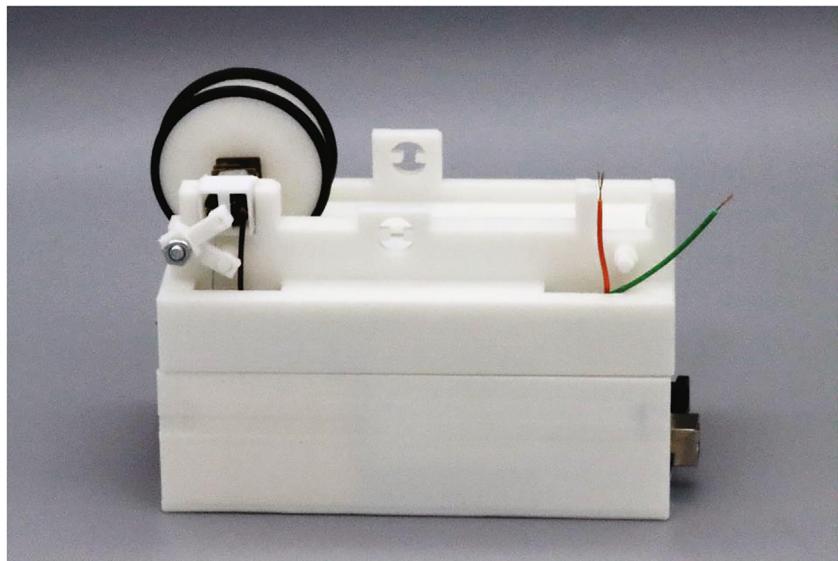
Wheel height adjustment unit is assembled with the motor holder.
